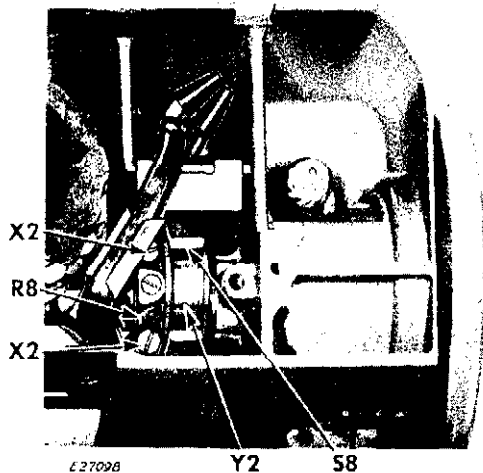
Feed Lifting Connecting Rod on Arm Shaft
